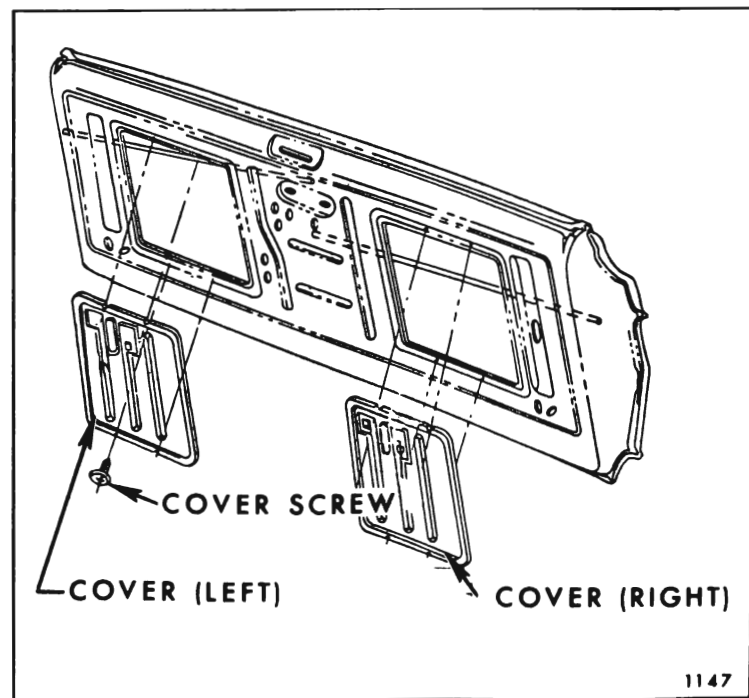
Tail Gate Inner Panel Access Hole Covers
